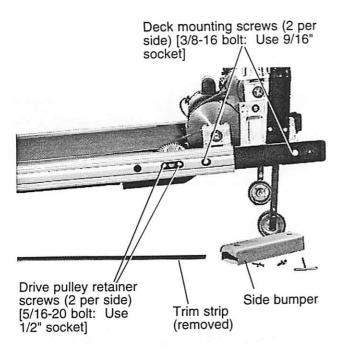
Deck Mounting Screws and Drive Pulley Retainer Screws
